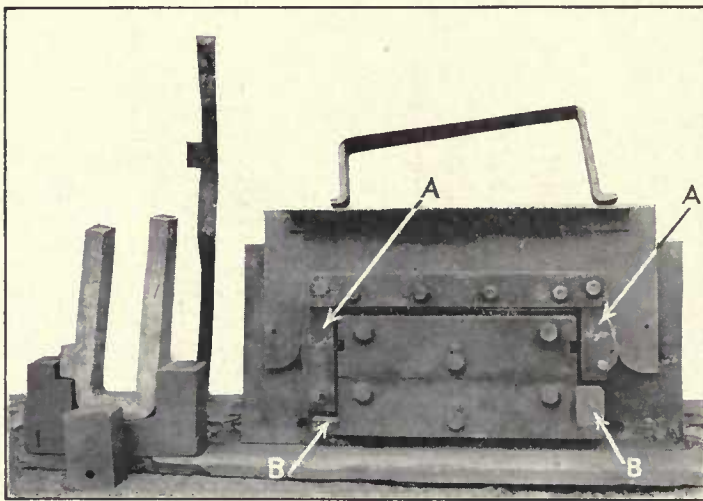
Dies for Bending Main Rod Straps under a Steam Hammer and for Forging Coal Car Hopper Carrier Irons.
